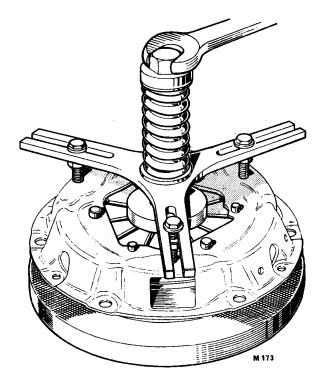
Tighten down the large nut so that the diaphragm spring is compressed flat
